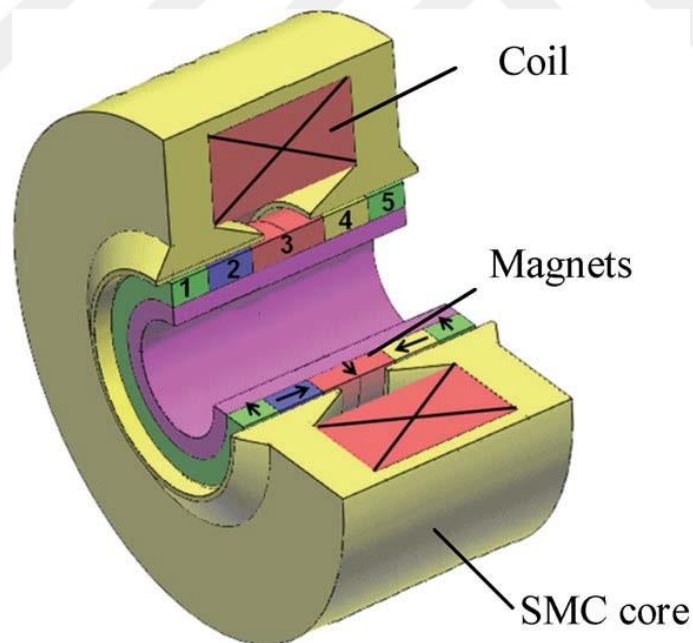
Tubular linear oscillating machine with single-pole coil stator and permanent magnet mover with the magnets in Halbach array configuration [32]
